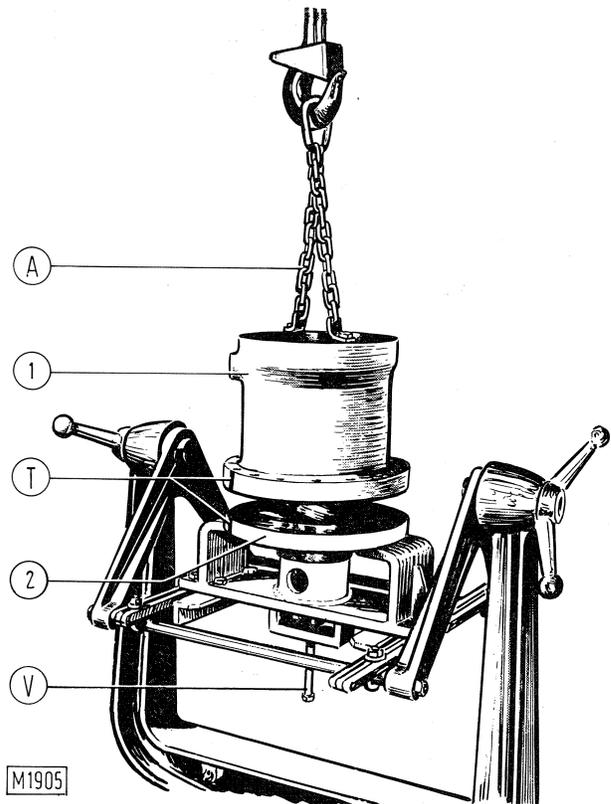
Removal-installation of motor housing (1). A. Lifting chain 75291517 - T. Timing marks on housing and on front end plate - V. Pinion shaft locking screw - 1. Housing - 2. Front end plate.
